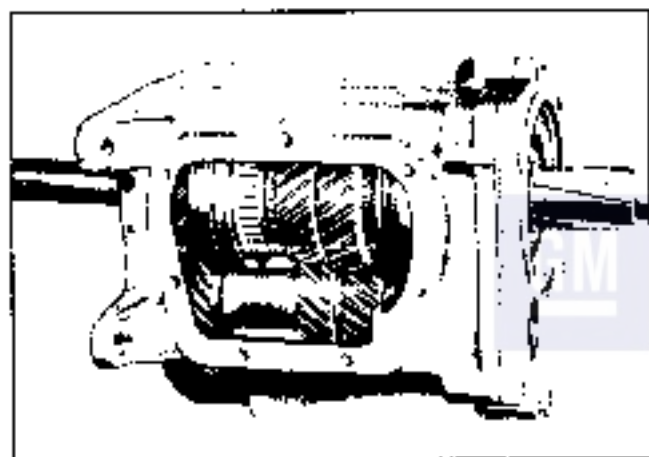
D-11 3rd and 4th Speed Synchronizer Sleeve in 4th Gear Position
